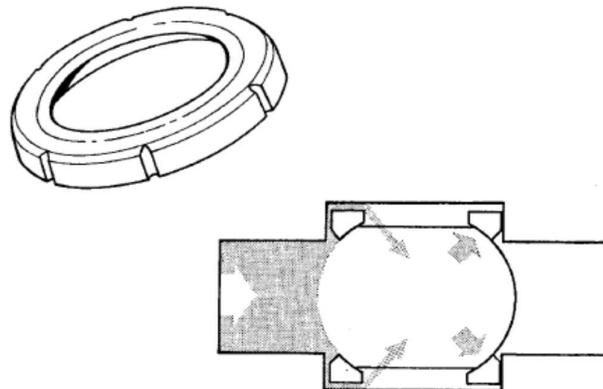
Schematic View of Ball Valve with Floating Ball and Torsion Seats, Showing Function of Pressure-Equalizing Slots in Periphery of Seats. (Courtesy of Worcester Valve Co., Ltd.)
